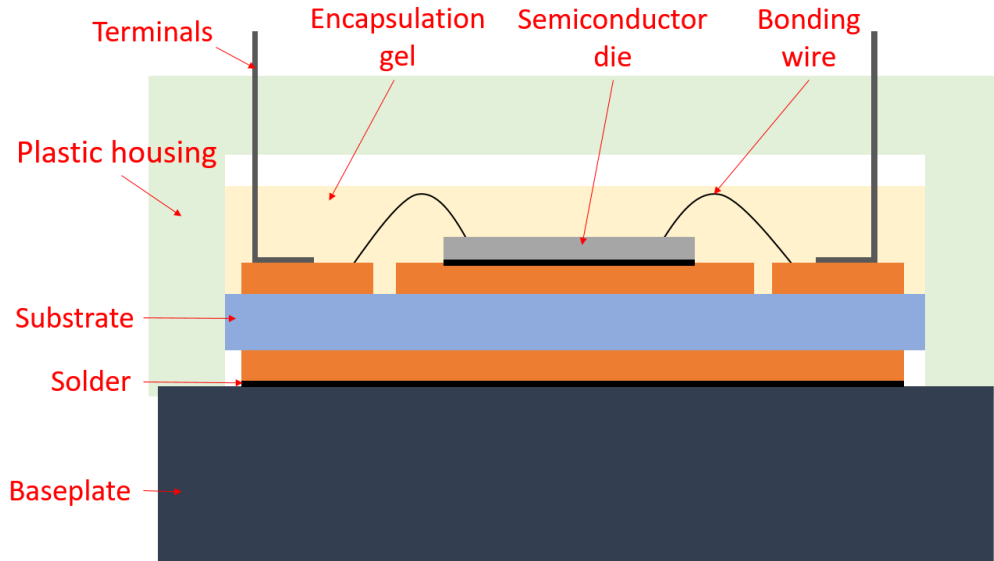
1 A conventional wire bonding power module packaging structure.
